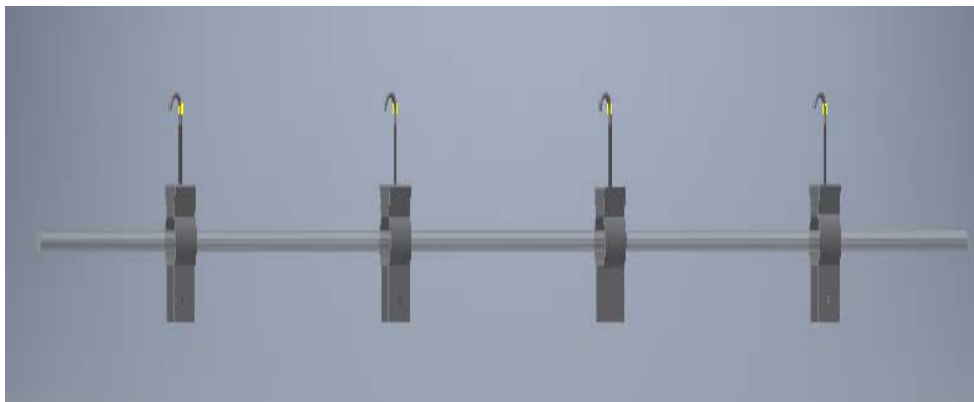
Assembly draft for side glow attachment. Inventor Autodesk draft of the assembly of fiber optic (side glow) cable with the attachments to hold on the rack.
